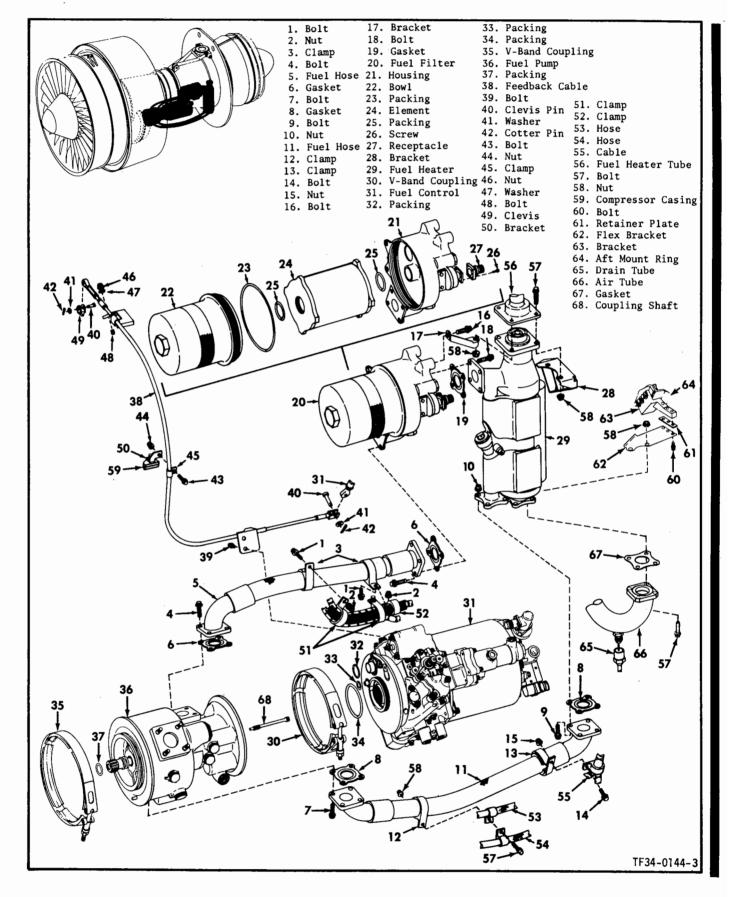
Fuel Control, Fuel Heater, Fuel Filter and Components
